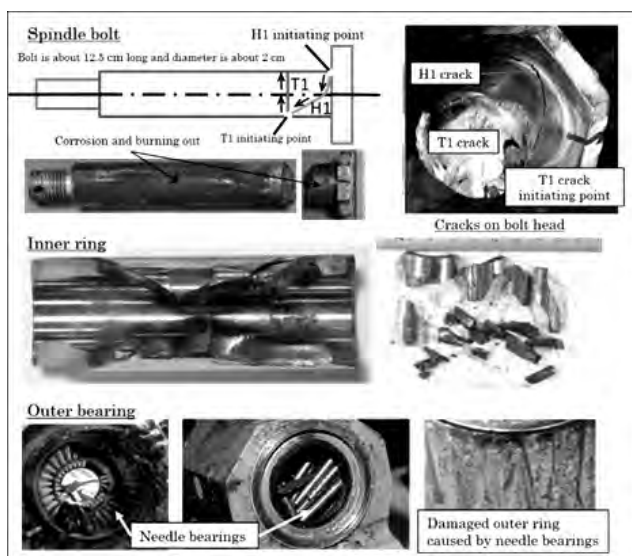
Detail of spindle bolt, inner ring, and outer bearing.
